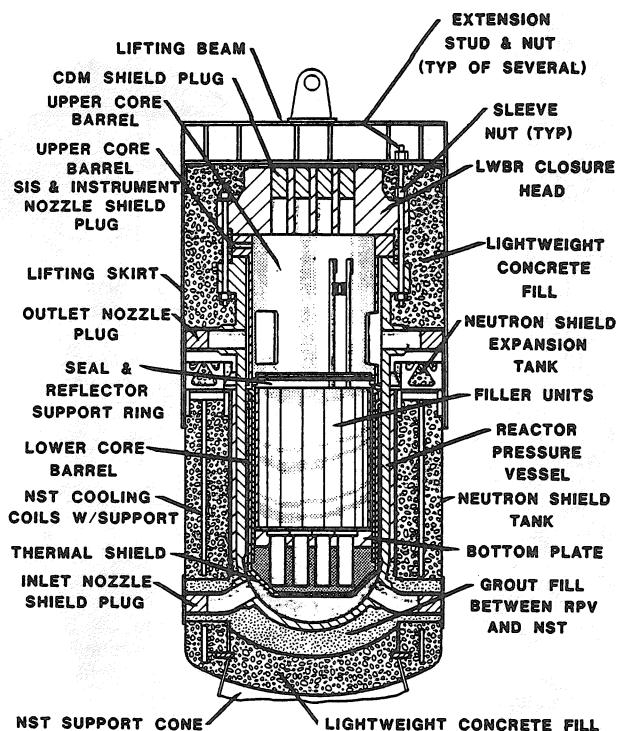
SHIPPINGPORT VESSEL PACKAGE CONFIGURATION
